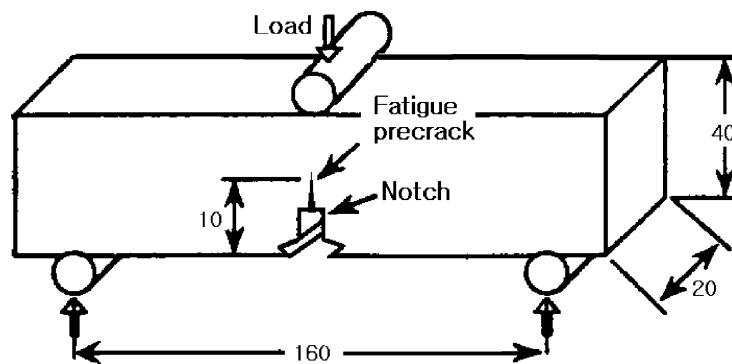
Schematic illustration showing CTOD test setup and specimen geometry.
